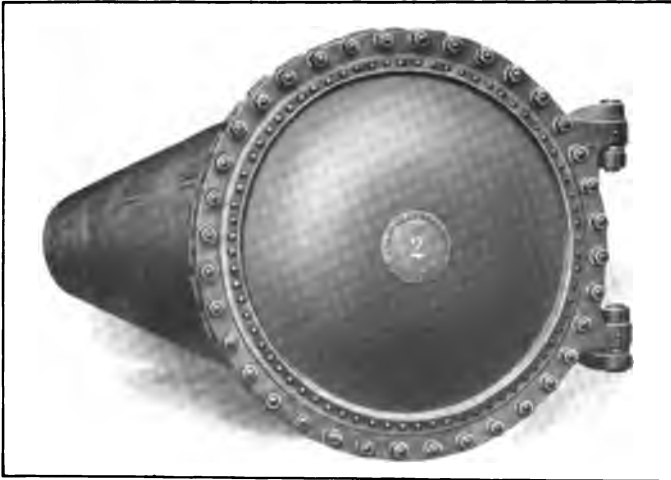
FIG. B.—Construction of a door with cast steel rim and dished plate steel head. (Photo. through courtesy of the Allis Chalmers Mfg. Co.)
